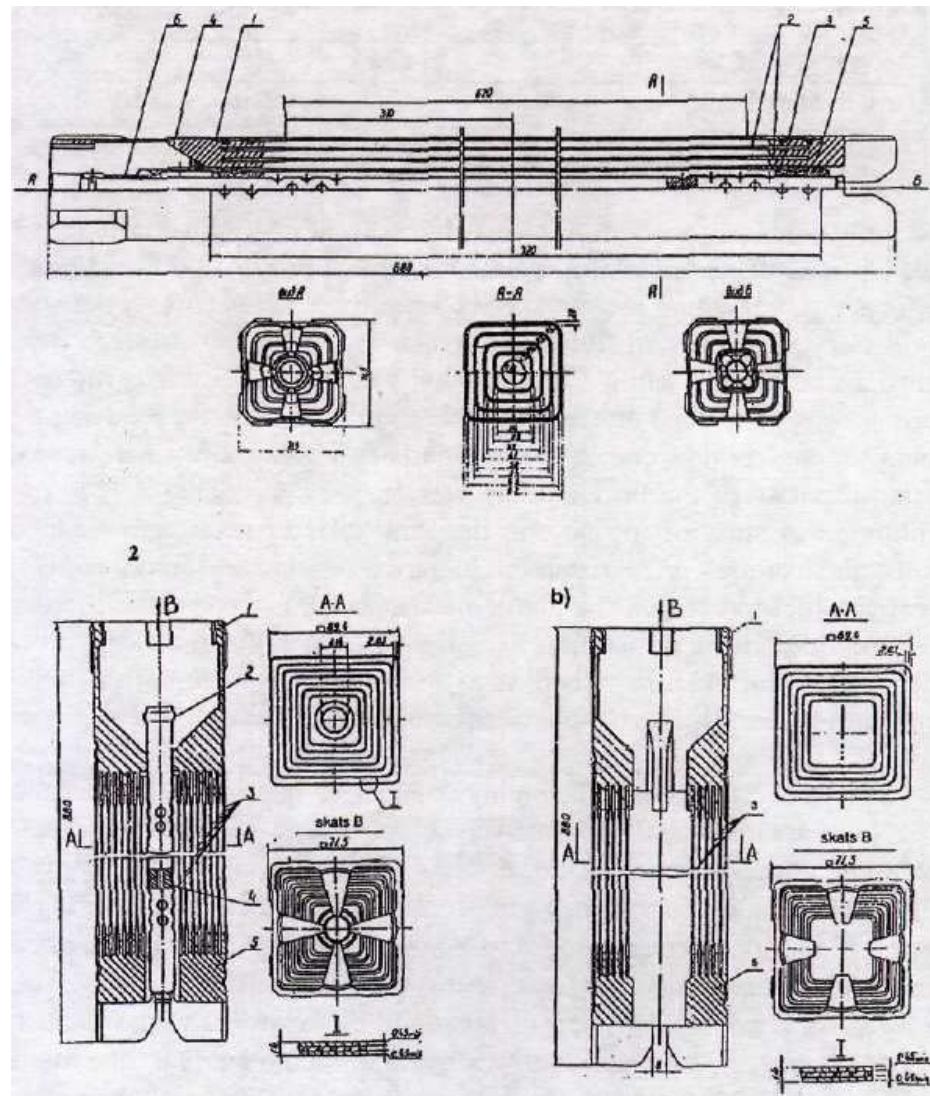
Reactor IRT-5000 fuel assemblies
